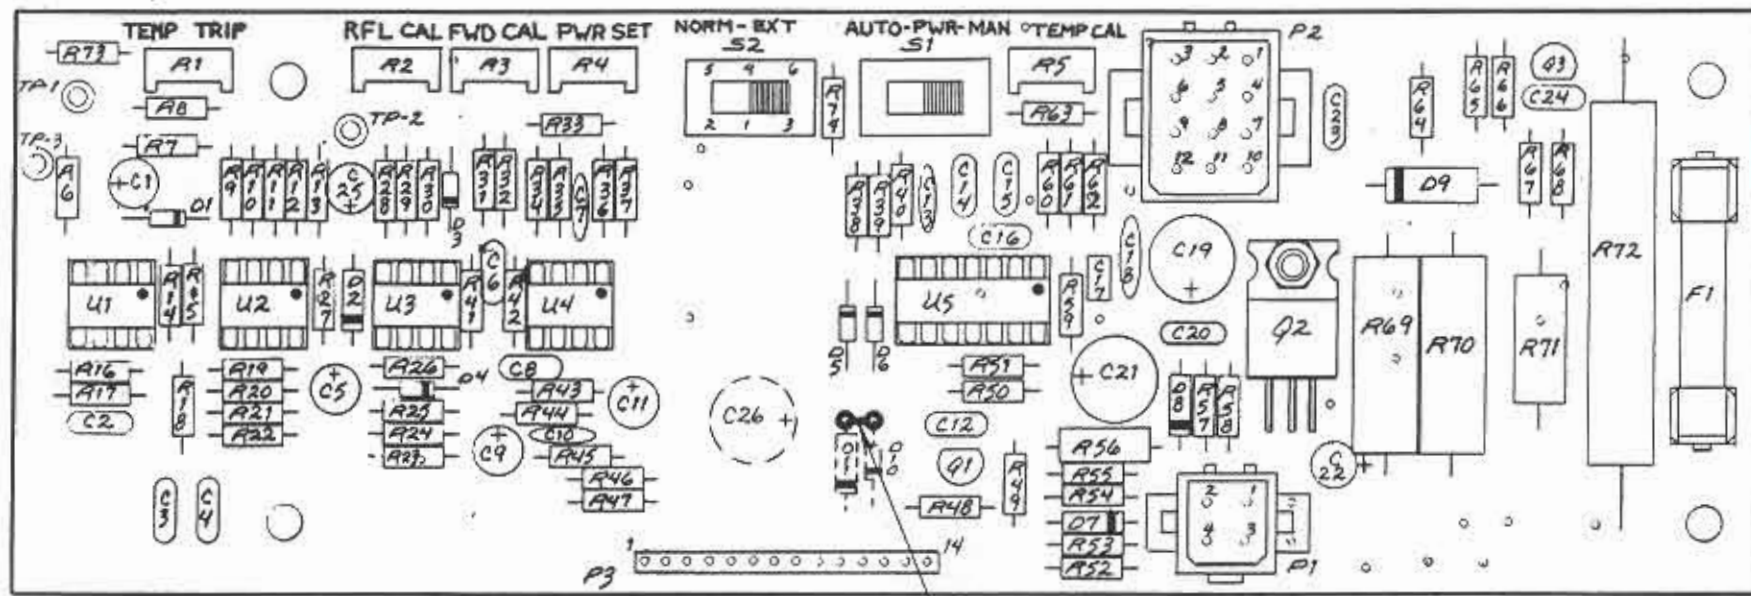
CONTROL CIRCUIT BOARD ASSEMBLY C917-0028
